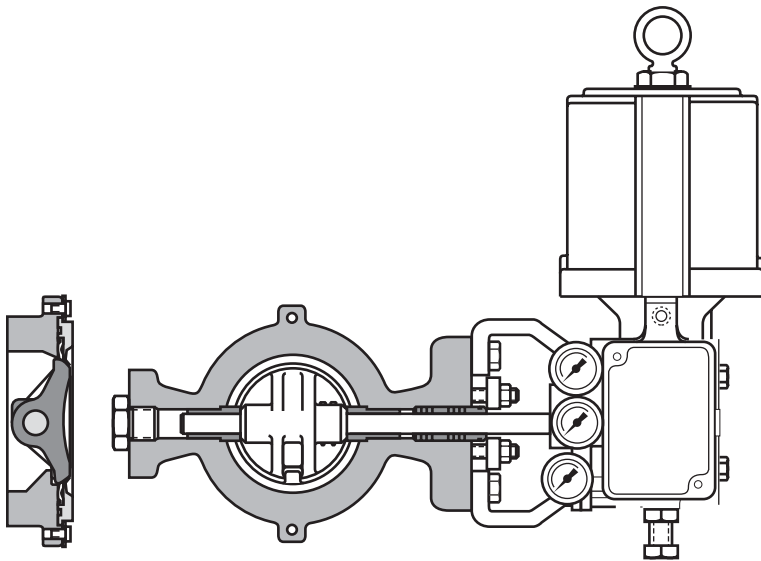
Flangeless butterfly control valve (wafer style). (Courtesy of Valtek International)
